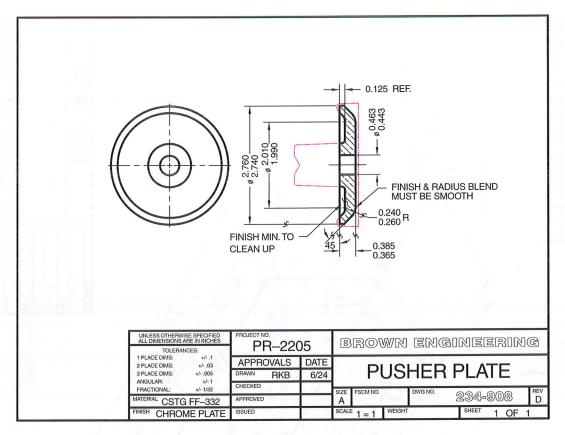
A composite casting drawing with finished machining dimensions given.
